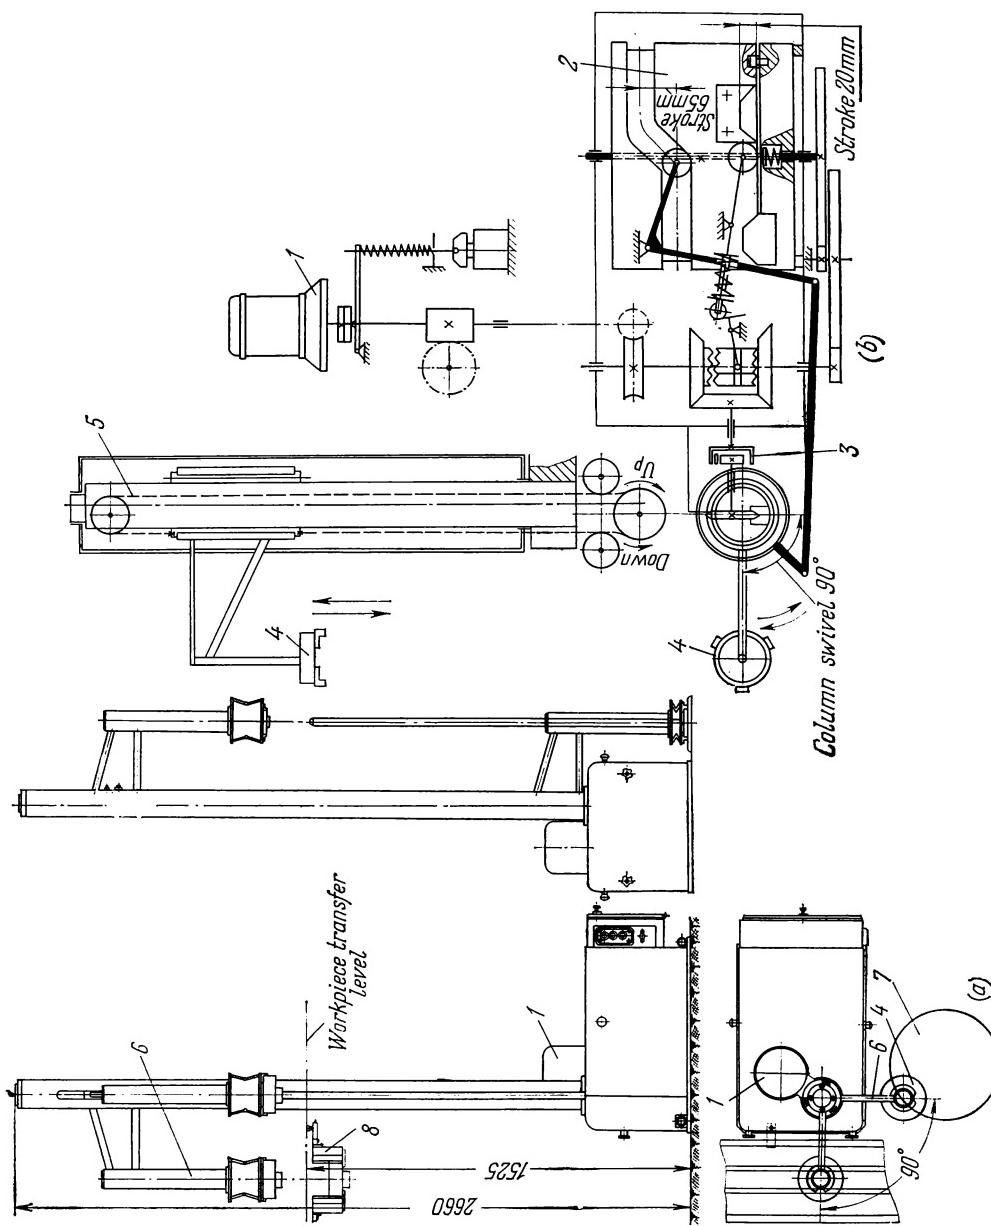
Loading-unloading manipulator of the transfer machine for single-rim gear production:
